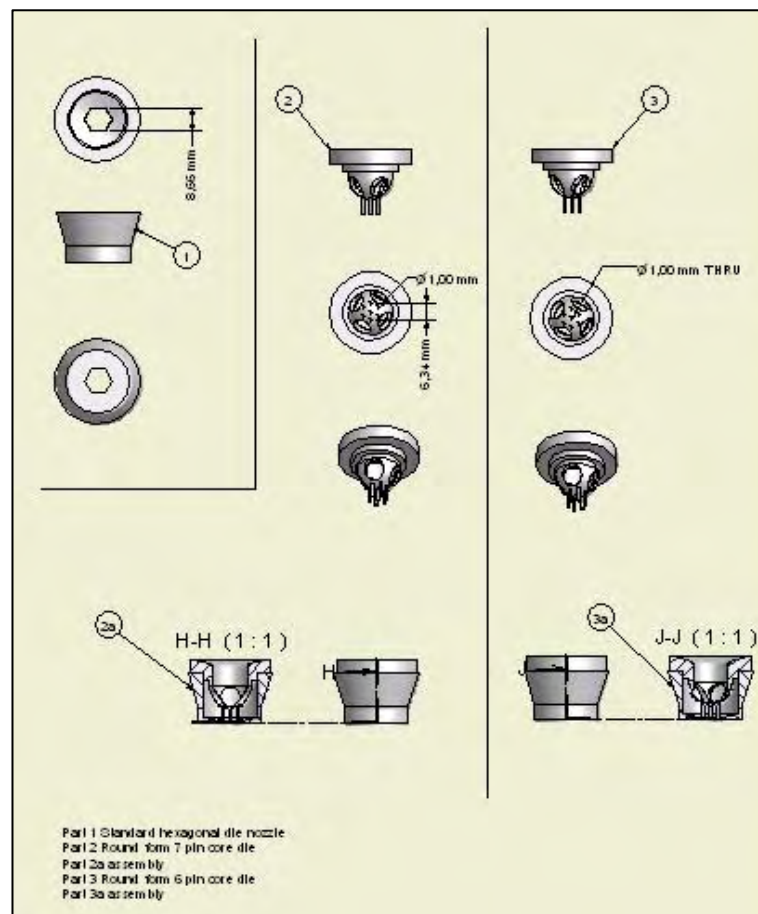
Drawing of 6-pin-die and 7-pin-die for the 1st experiment on 1-ring-element stacking 1R-SEST fibre fabrication
